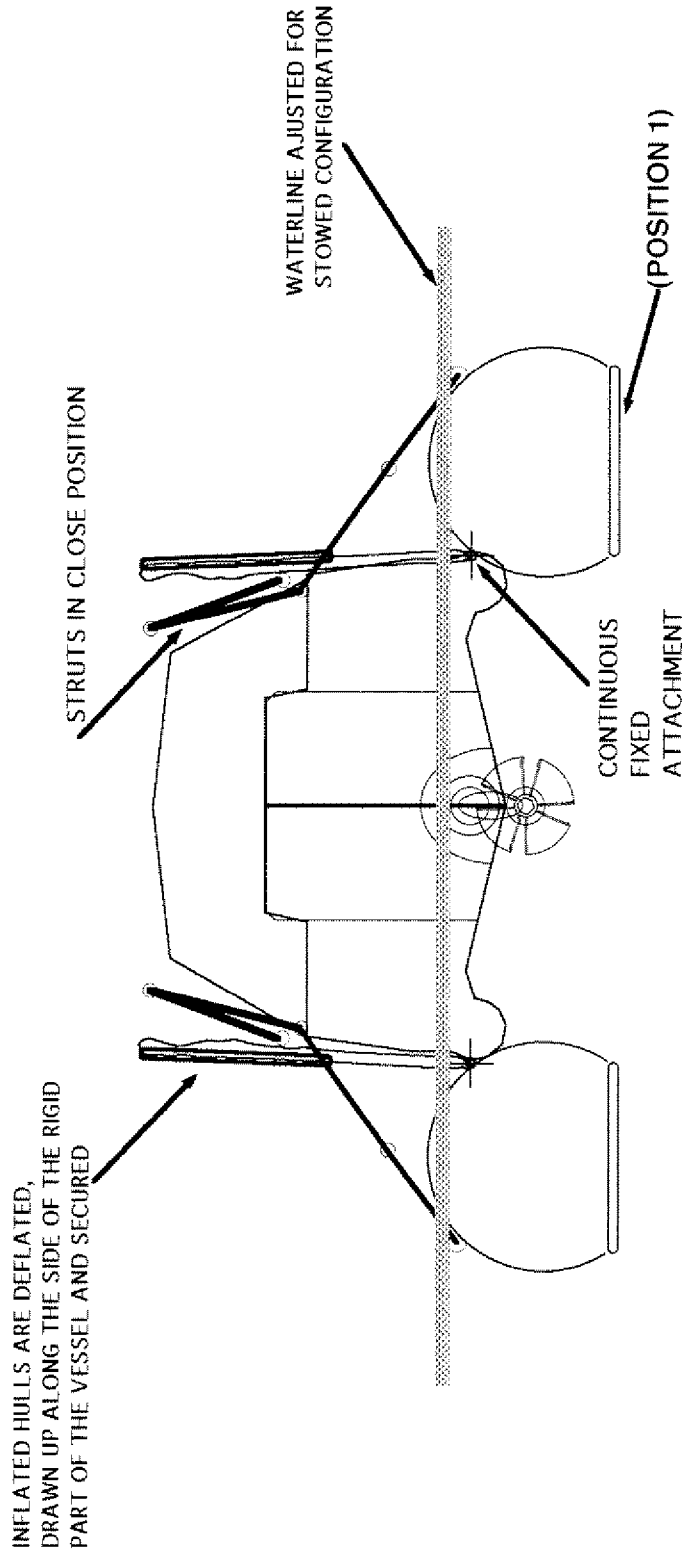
STOWED OR MINIMUM WIDTH CONFIGURATION
